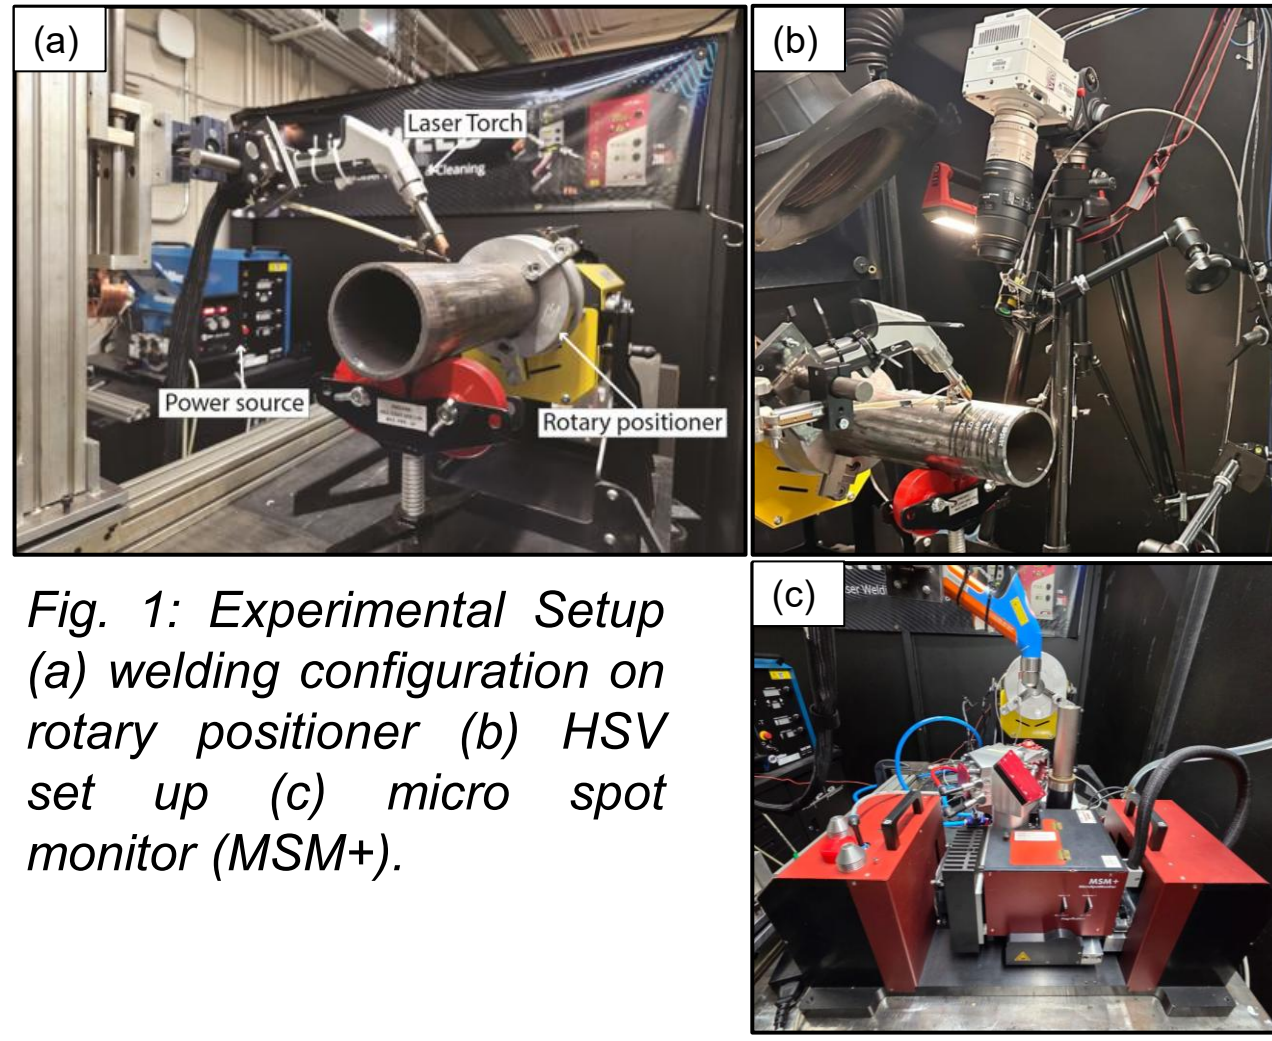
Experimental Setup (a) welding configuration on rotary positioner (b) HSV set up (c) micro spot monitor (MSM+).
